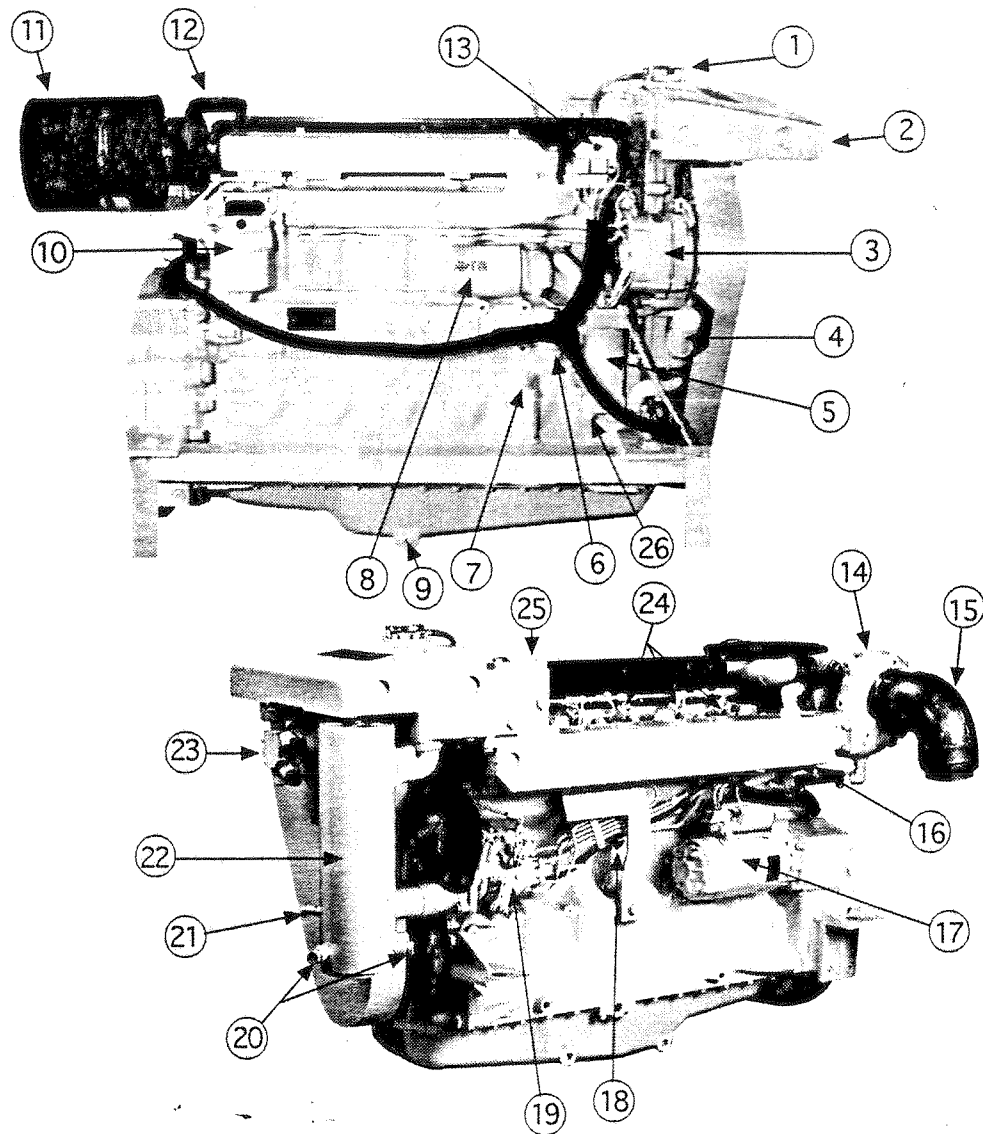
L668T HE without gear. (Note: The components of L668D are in a similar location.)
